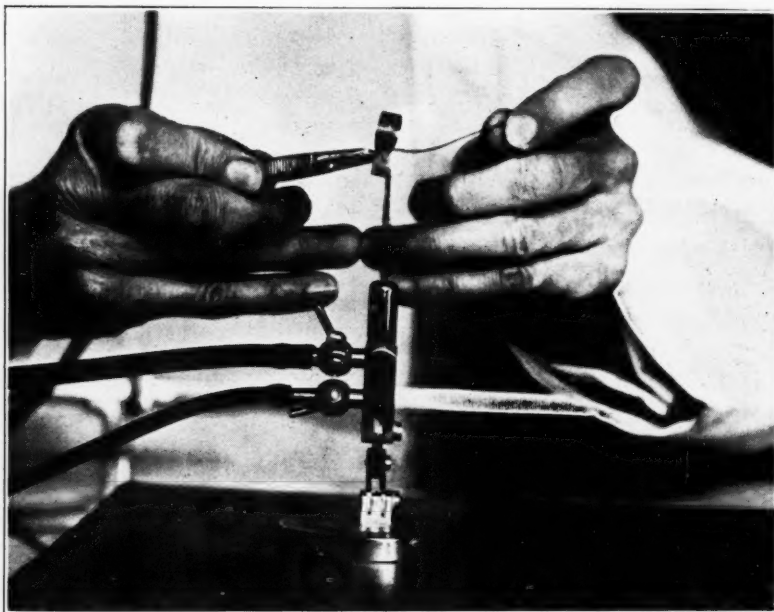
Band is heated to a red heat after ends have been placed together and seam is touched quickly with wire solder. Sharp pin point flame should be used and piece heated to high temperature before solder is touched to band.
